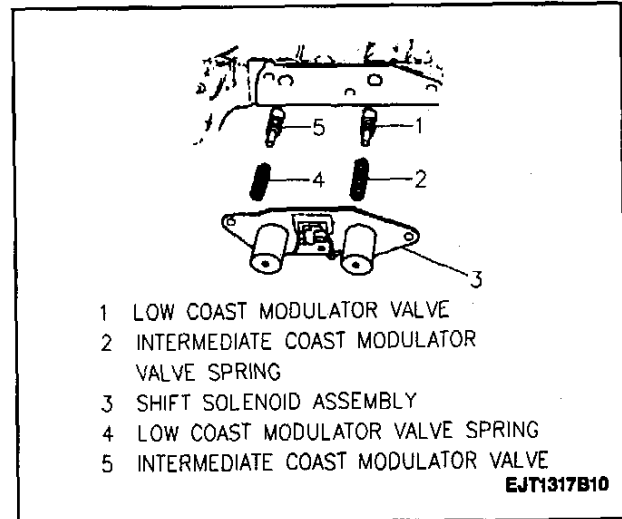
Shift Solenoid Assembly Components (03-72LE, 4-Speed)
